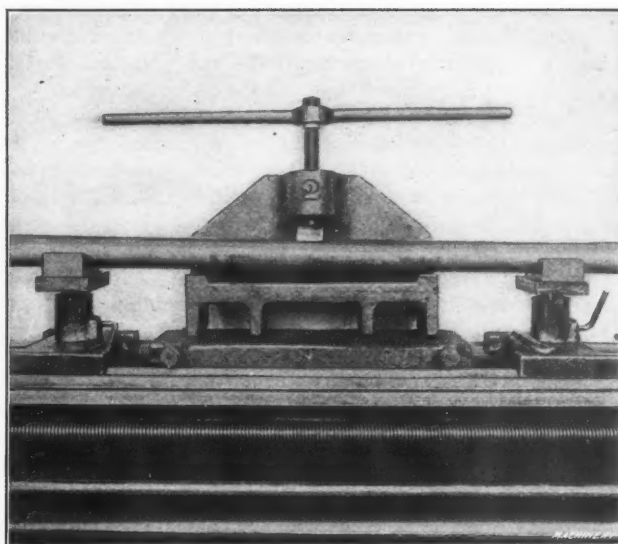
Hand-operated Shaft Straightener, mounted on Truck which fits Lathe Bed
